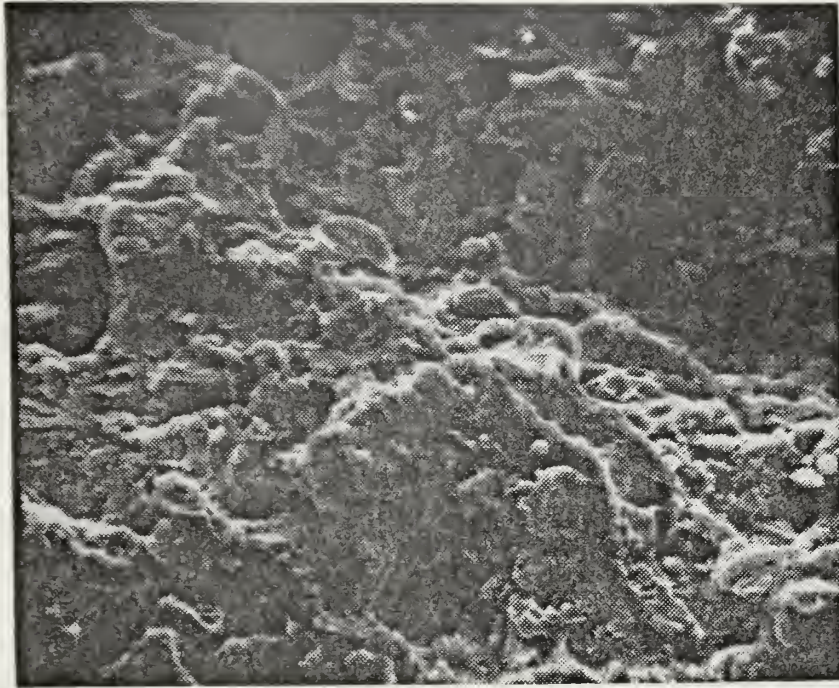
Higher magnification view of Fig. 83 fractograph showing brittle fracture surfaces consisting of cleavage facets with some dimples. X2000.
